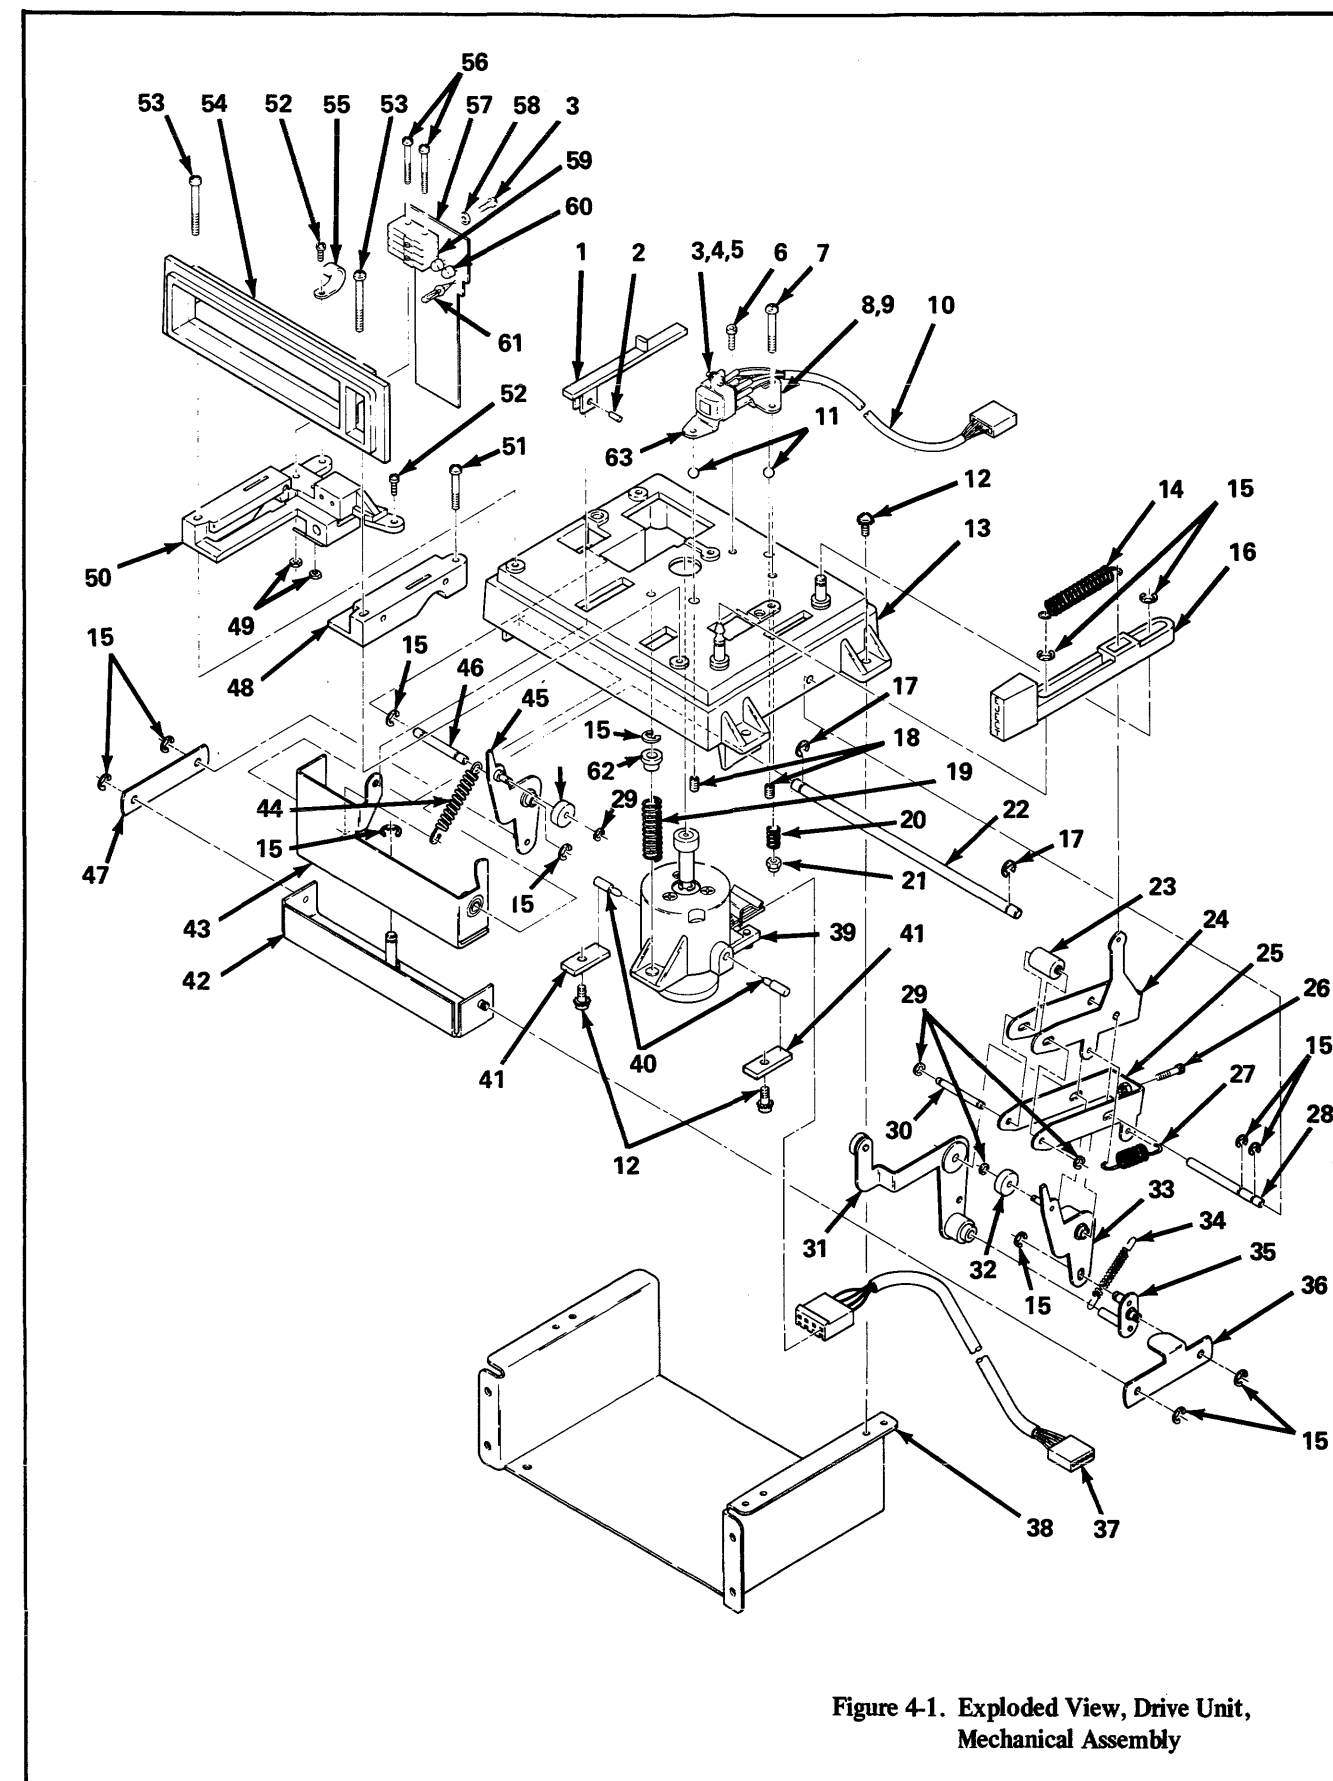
Exploded View, Drive Unit, Mechanical Assembly
